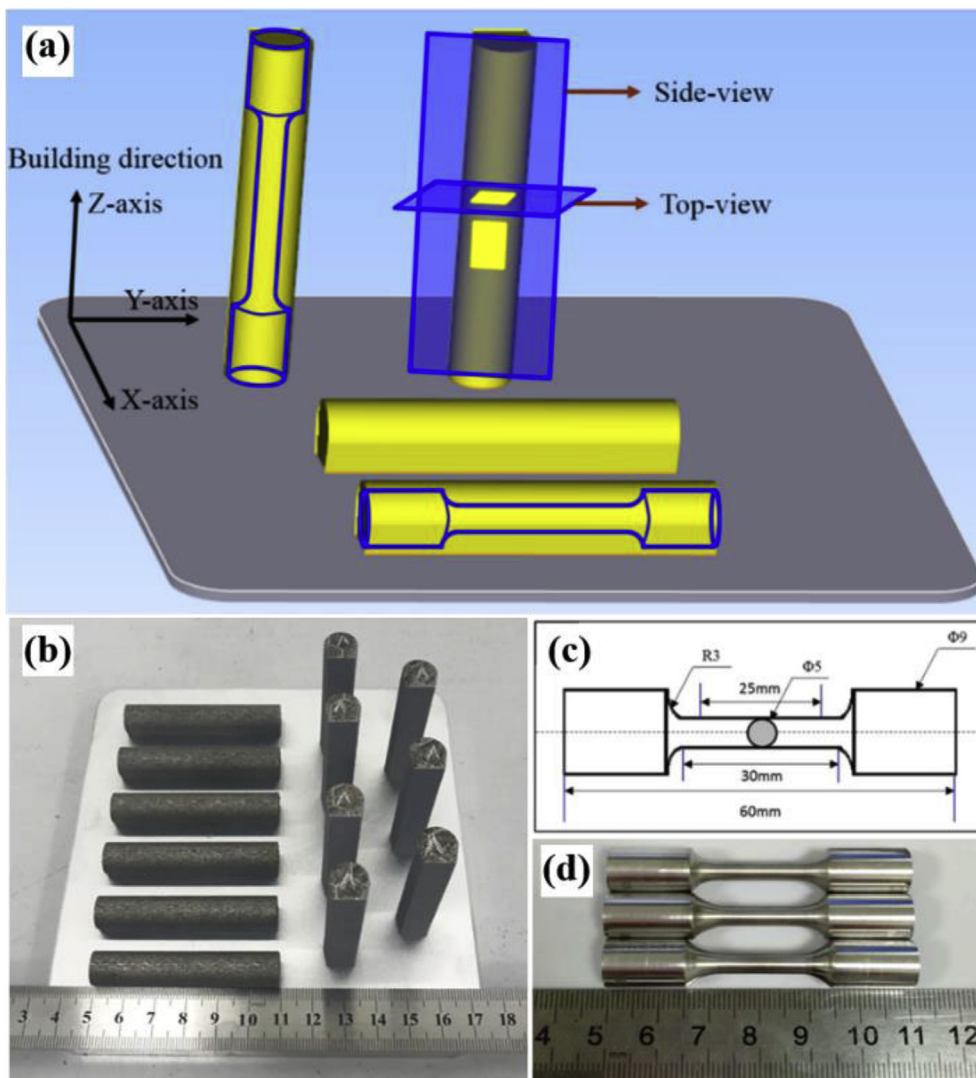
SLMed specimens: (a) Schematic diagram (b) Room temperature tensile parts at two directions, (c) configuration (Gage length: 25 mm), and (d) tensile specimens after machining.
